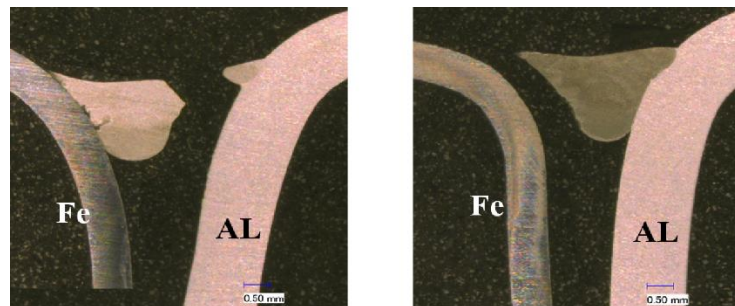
Fractured samples of tensile test: (a) dual cross beam, (b) dual in-line beam.
